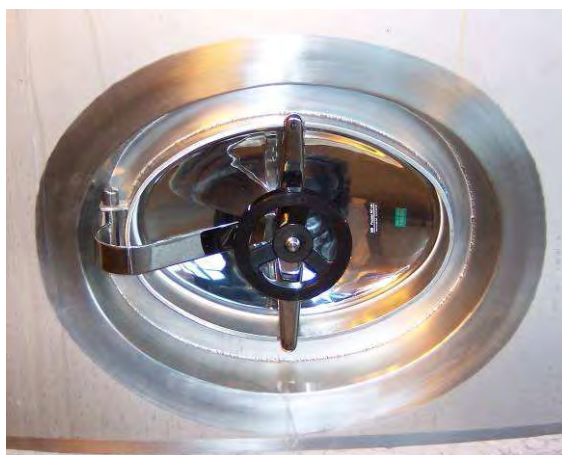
Stainless steel inspection hatches installed in the main Clandeboye Dryer #2 baghouses
